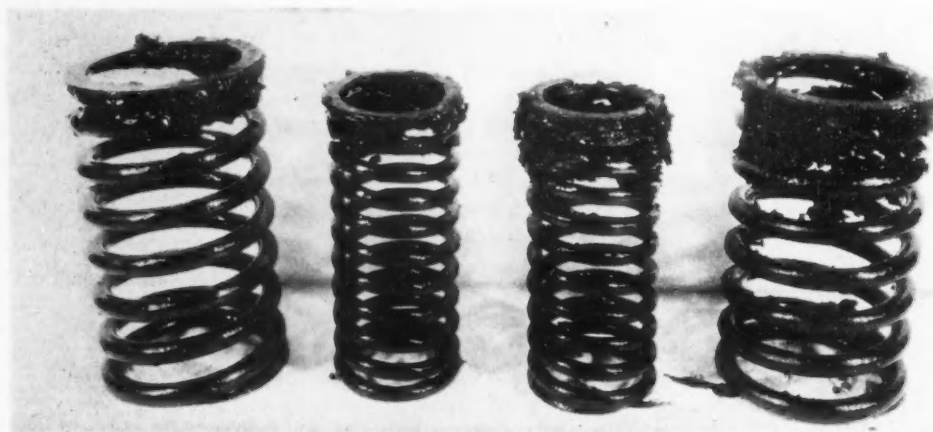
(left)—Sticky Deposits on Valve Springs from an Automobile Engine
